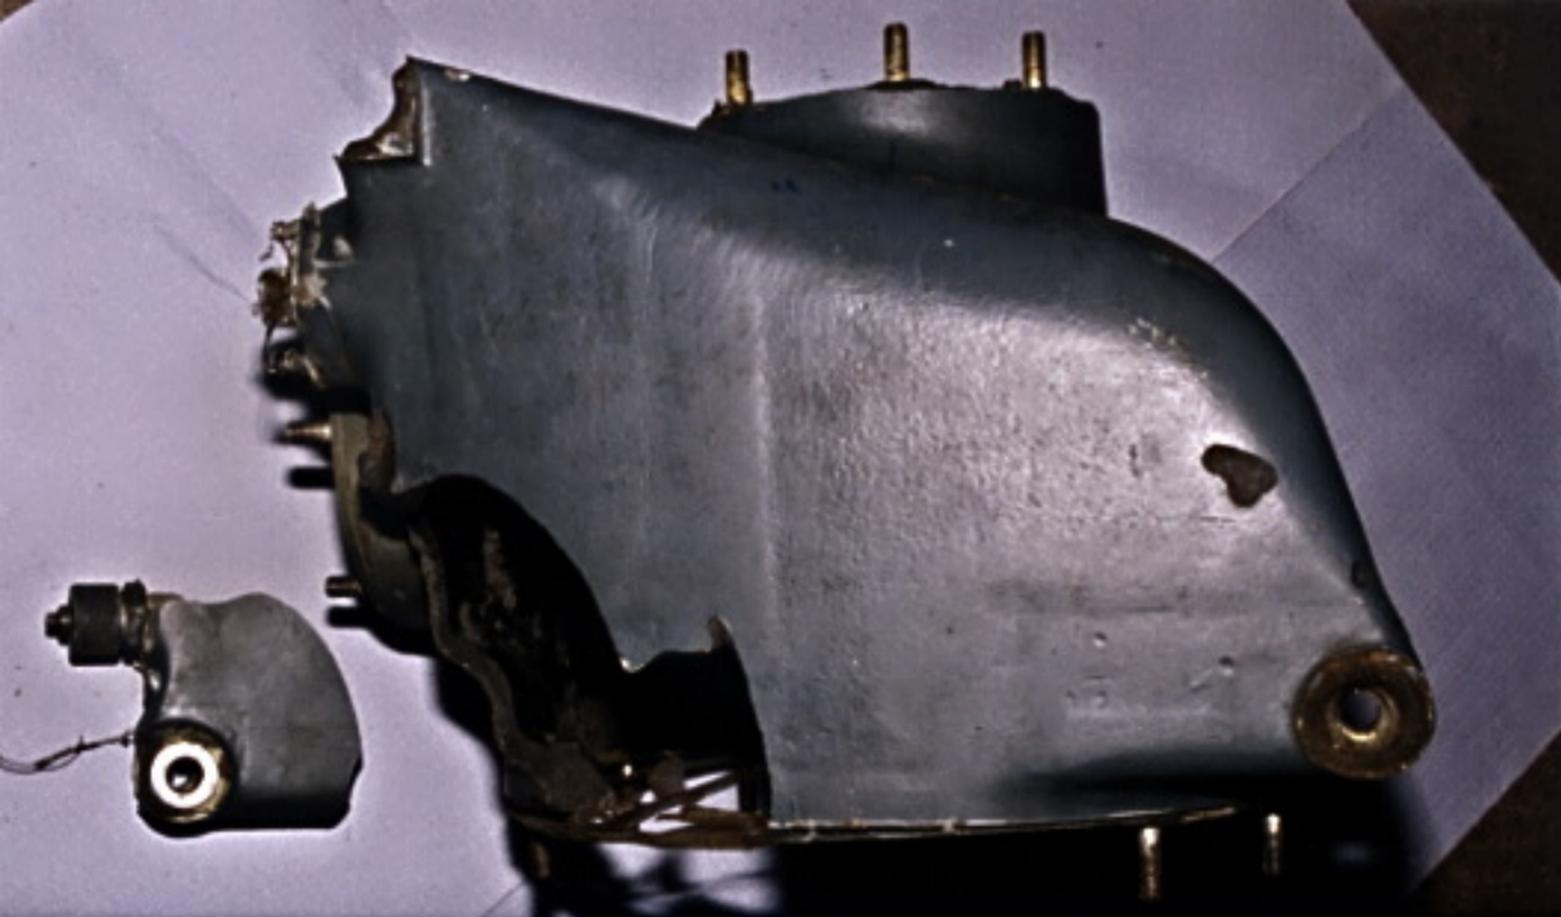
Showing failed lower attachments of gearbox (left attachment is upper one in this photograph, right is lower).
